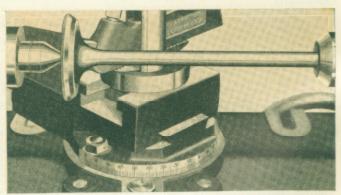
Compound Rest of Lathe Set at 45° Angle for Refacing Valves
